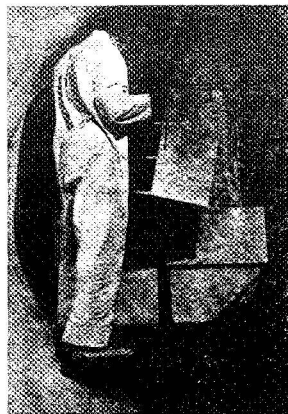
STEM INTERNAL EQUIPMENT ASSEMBLY AND POSITIONING SEQUENCE
